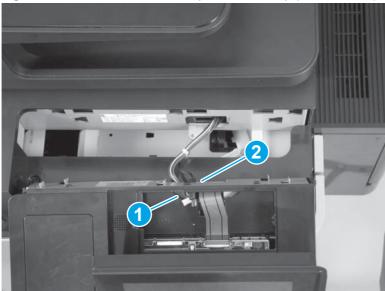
Remove the control panel assembly (M880; 8 of 8)
